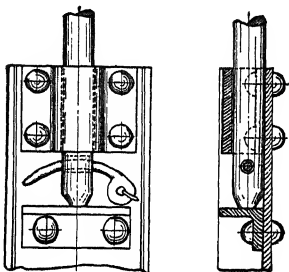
Round bail with straight ends fitting into sockets riveted to car arms.
